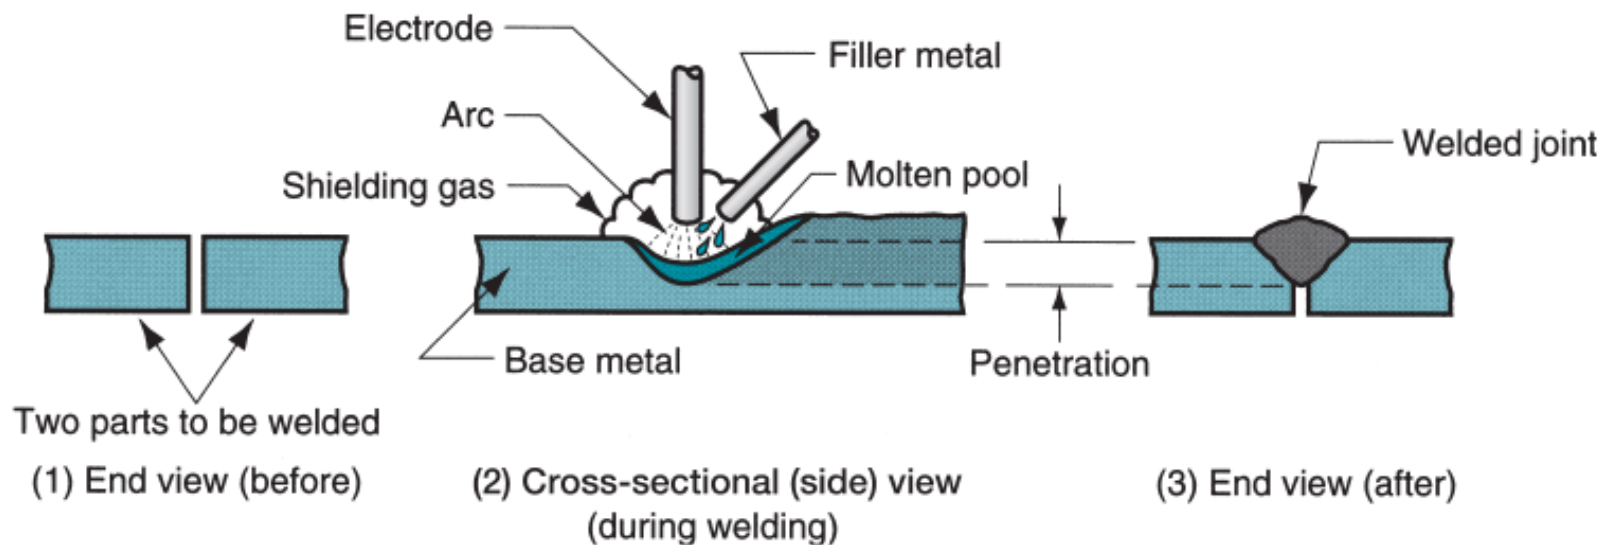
Basics of arc welding: (1) before the weld; (2) during the weld (the base metal is melted and filler metal is added to the molten pool); and (3) the completed weldment. There are many variations of the arc-welding process. (Credit: *Fundamentals of Modern Manufacturing*, 4th Edition by Mikell P. Groover, 2010. Reprinted with permission of John Wiley & Sons, Inc.)
